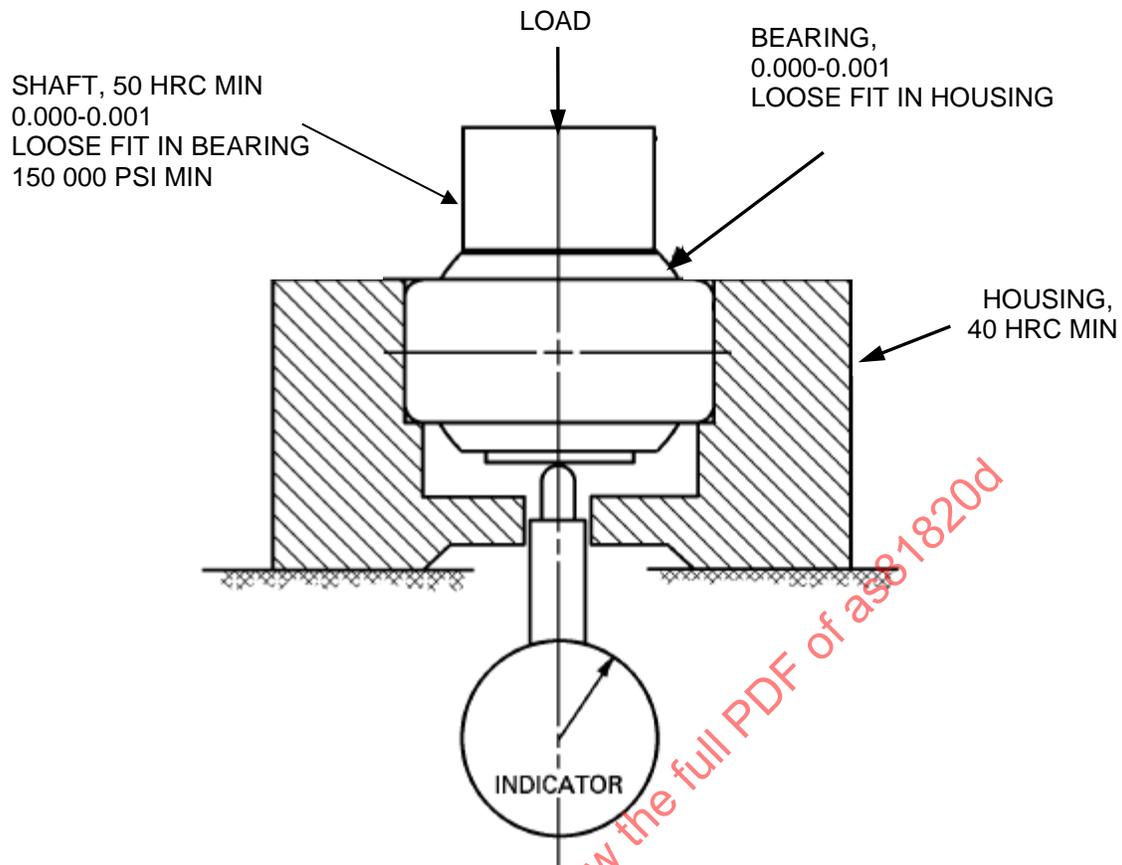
AXIAL STATIC LIMIT LOAD TEST FIXTURE
